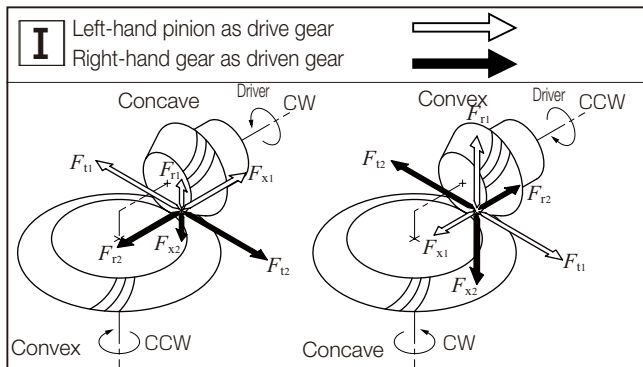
The Directions of Forces Carried by Spiral Bevel Gears
